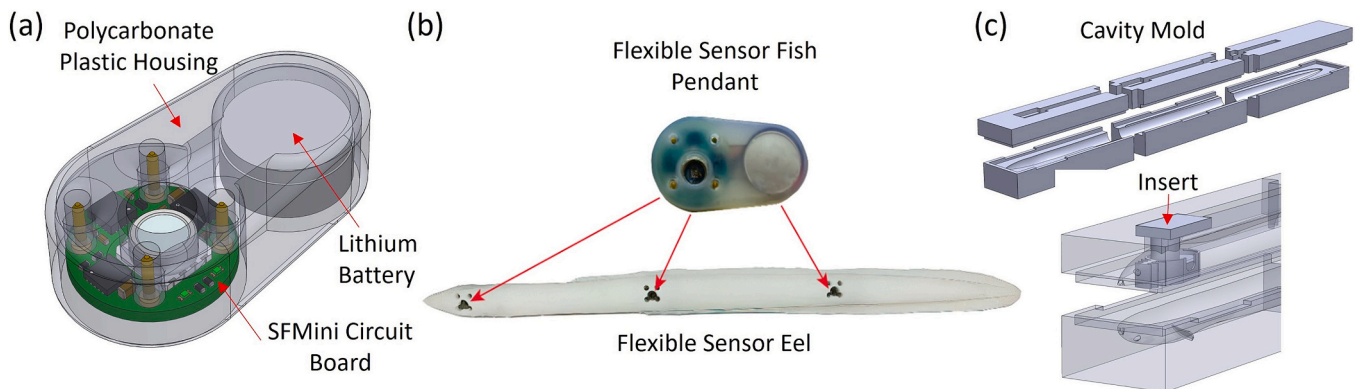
Manufacturing method of the Flexible Sensor Eel (SFE). (a) 3D rendering of the FSF Pendant, highlighting its key components, including the thin multilayer PCB with sensors, a lithium battery, and a polycarbonate housing sealed in epoxy. (b) Photograph of the FSF Pendant and the FSE, showing where it was embedded in the eel's body. (c) Exploded view of the FSE cavity mold, indicating the placement location for the insert prior to molding.
